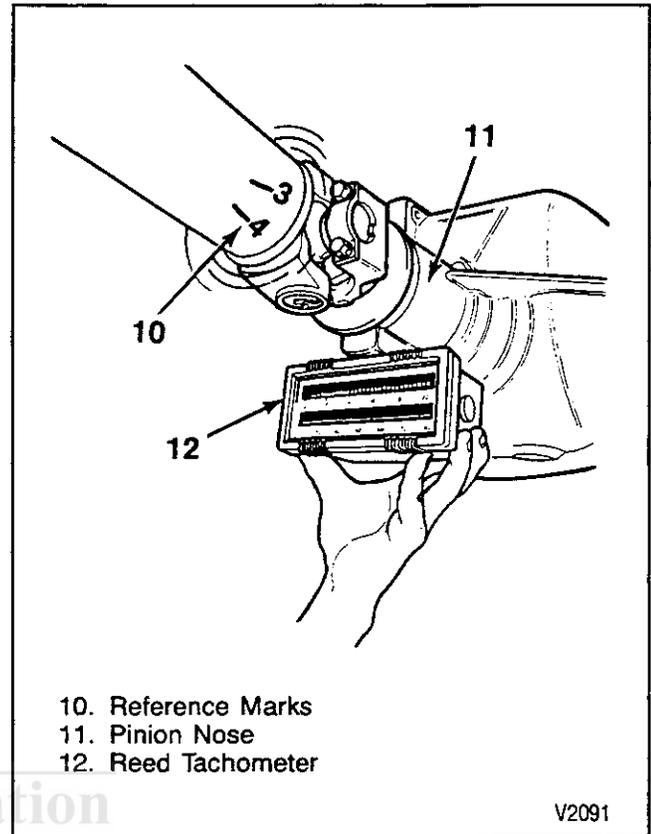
Propeller Shaft Reference Marks and Reed Tachometer Position
